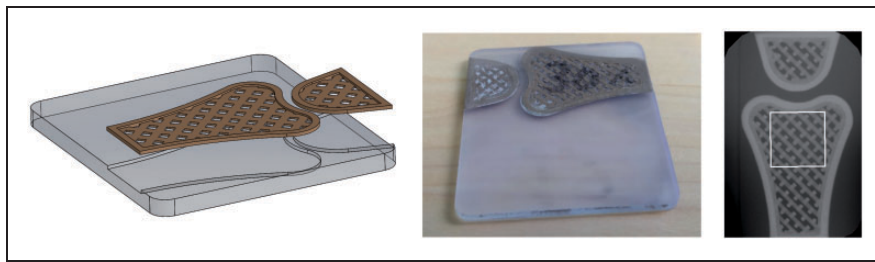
Type-A chips. Left: CAD drawing. Center: 3D printed chip. Right: radiogram.
